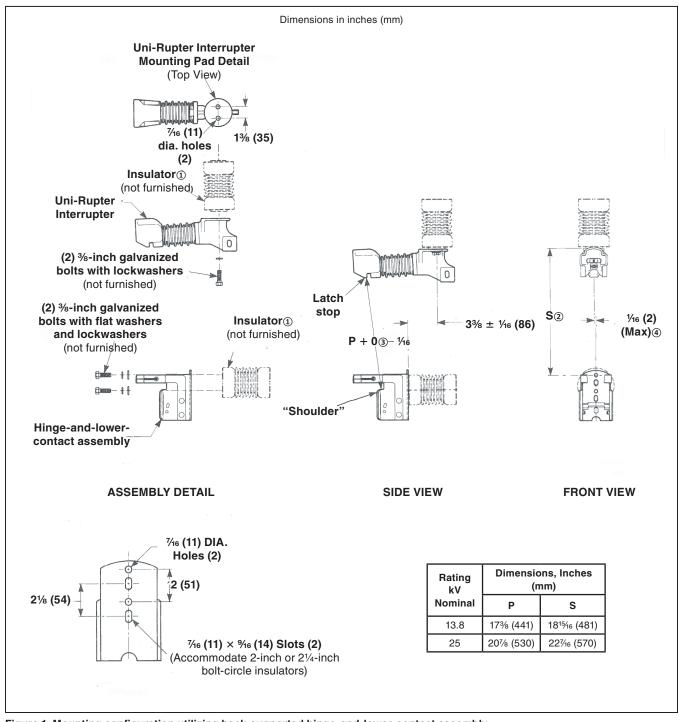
Mounting configuration utilizing back-supported hinge-and-lower-contact assembly.
